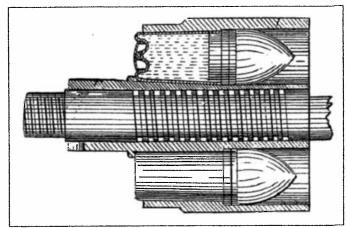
Cut-section of Thuer conversion 1860 Army cylinder showing cartridge position. (Modified from patent drawing)
